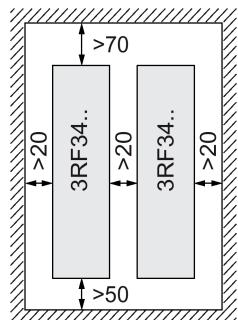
Clearances for stand-alone assembly (dimensions in mm)
